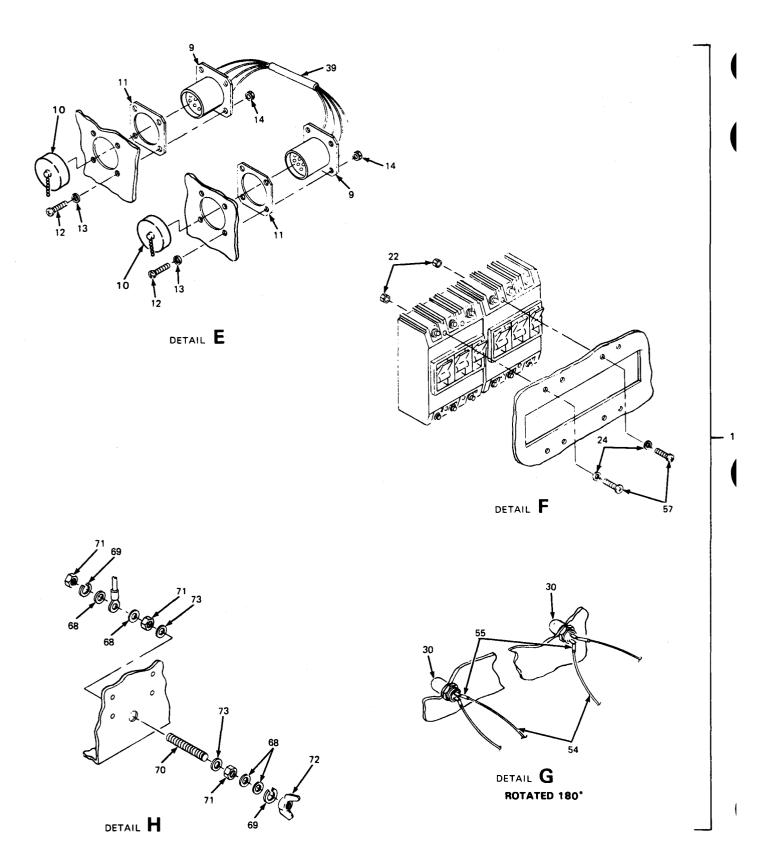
Four-Wire Switch Box Assembly (Sheet 3 of 3).
